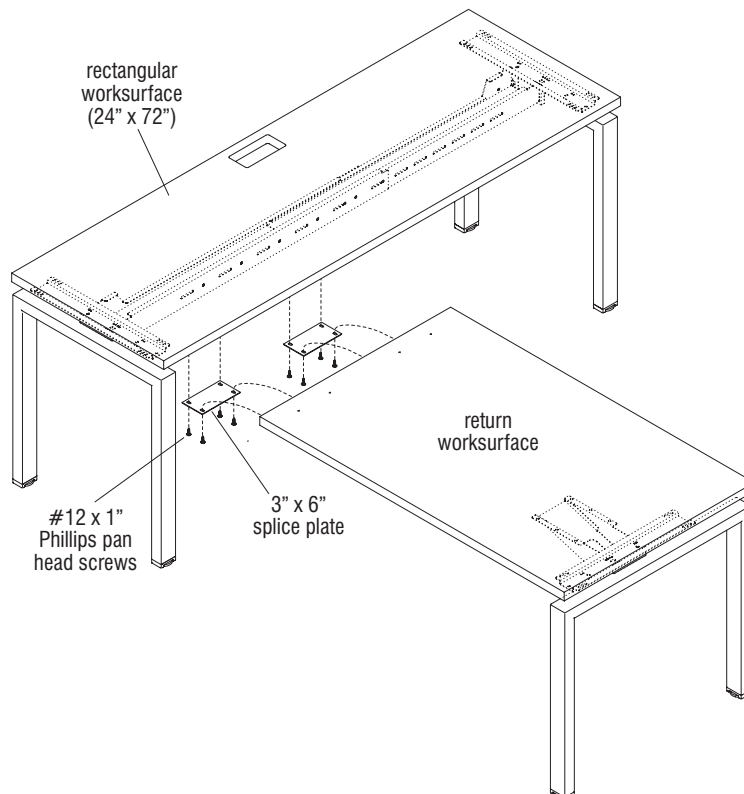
Single-Sided Fixed Benching - Perpendicular Support Frame Installation
